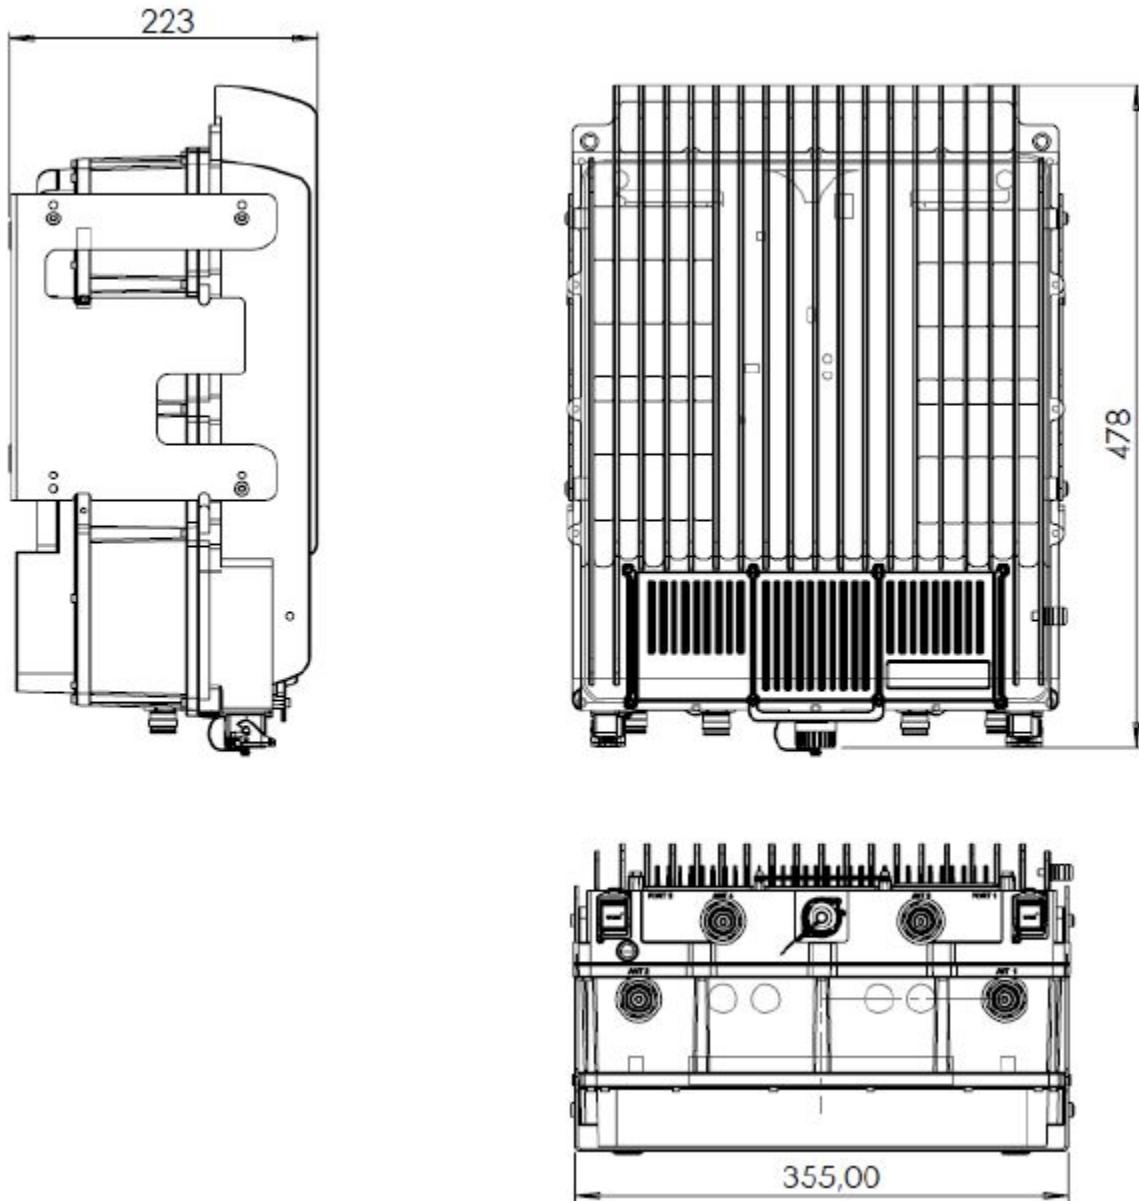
CAP M2 Mounting Dimensions (without fan unit)
